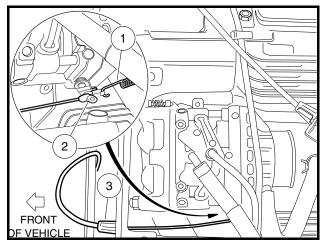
17 Z-Shaped Cable End in Hole at Pedal
